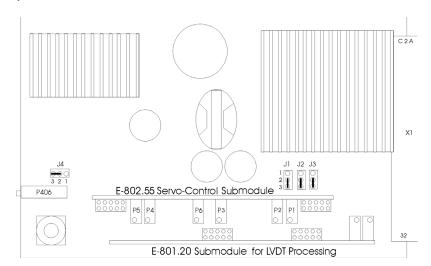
E-610.L0 layout: older equipment may have other submodule versions: see the submodule User Manuals for details
